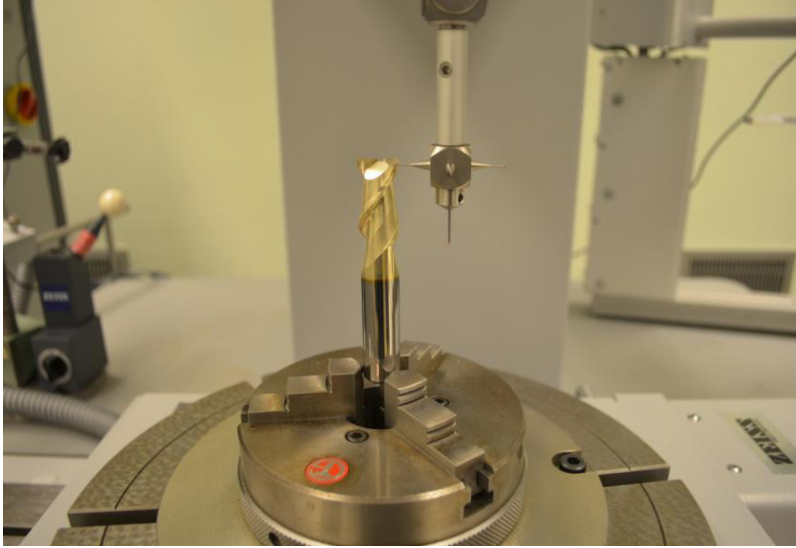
A contact mode 3D assessment of a machining tool geometry.
